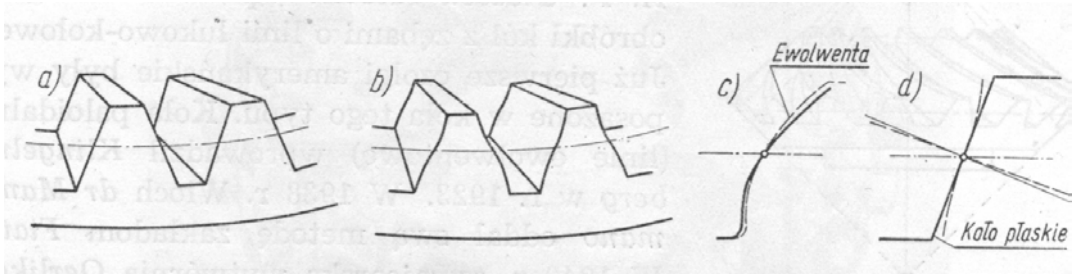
A simplified tooth form of a common crown gear (a); the correct tooth form (b); an involute tooth form and a tooth form obtained with the simplified tooth form of the crown gear (c); the pressure line (d) [2].
